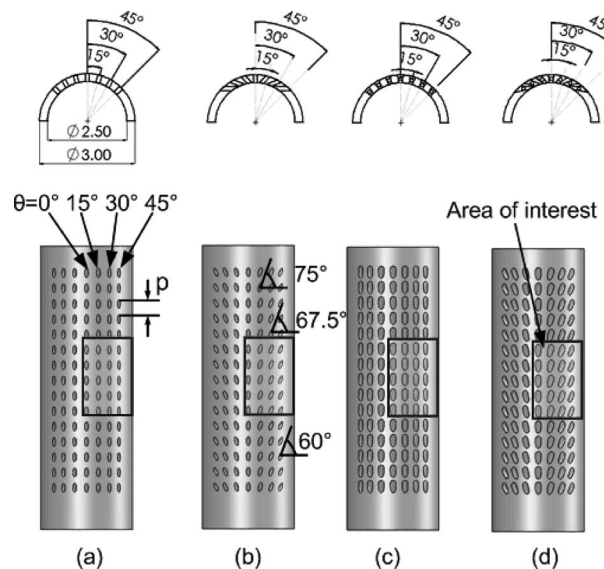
Seven-row film cooled leading edge models: (a) radial angle cylindrical holes, (b) compound angle cylindrical holes, (c) radial angle shaped holes, and (d) compound angle shaped holes
